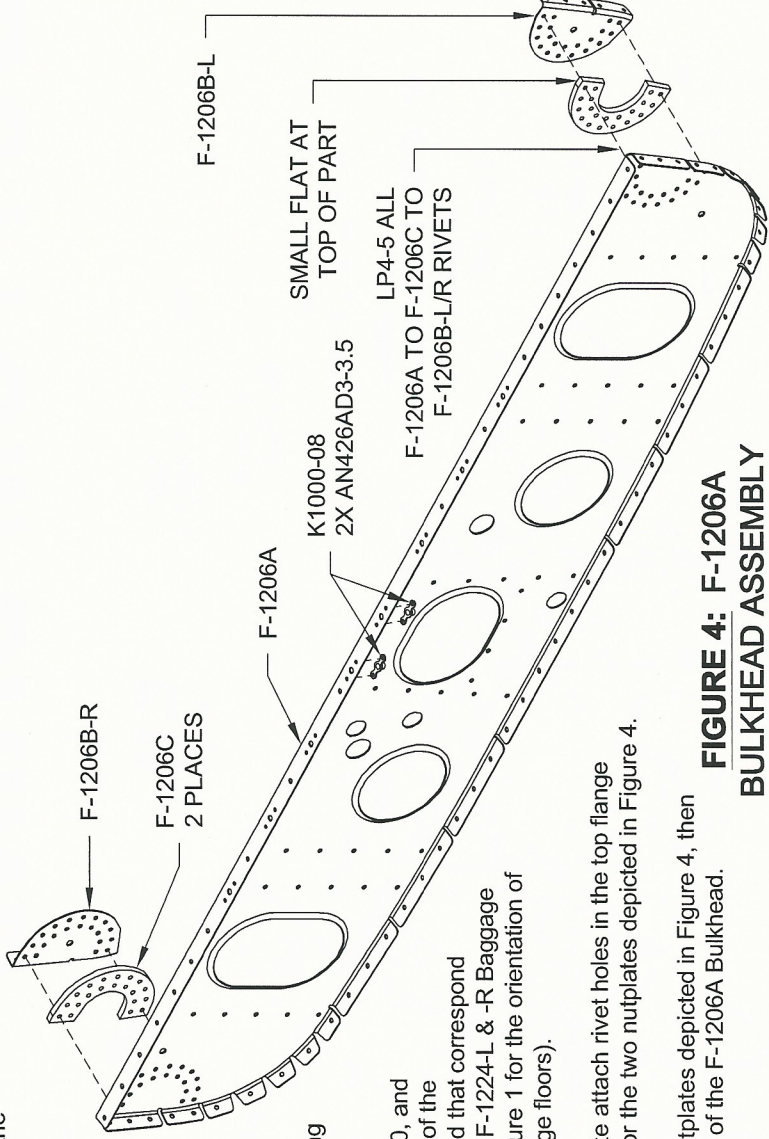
F-1206A BULKHEAD ASSEMBLY
